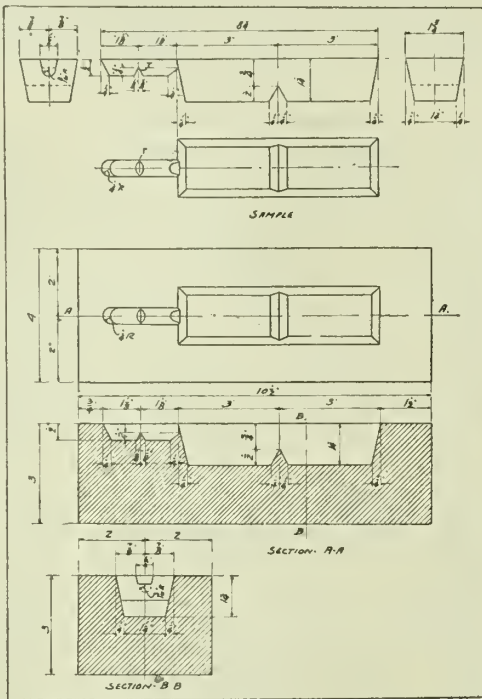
TEST PIECE AND MOULD FOR SAMPLING MOLTEN PIG-IRON. COMBINED CHEMICAL AND FRACTURE TEST.
